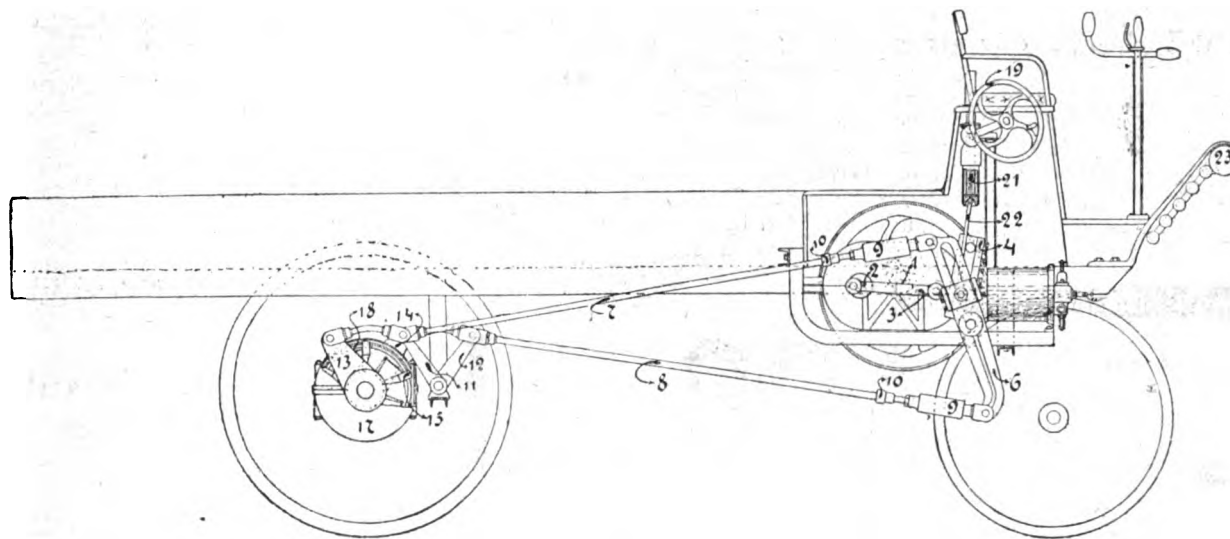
Sectional Elevation of Hagen Petrol Motor Wagon.
